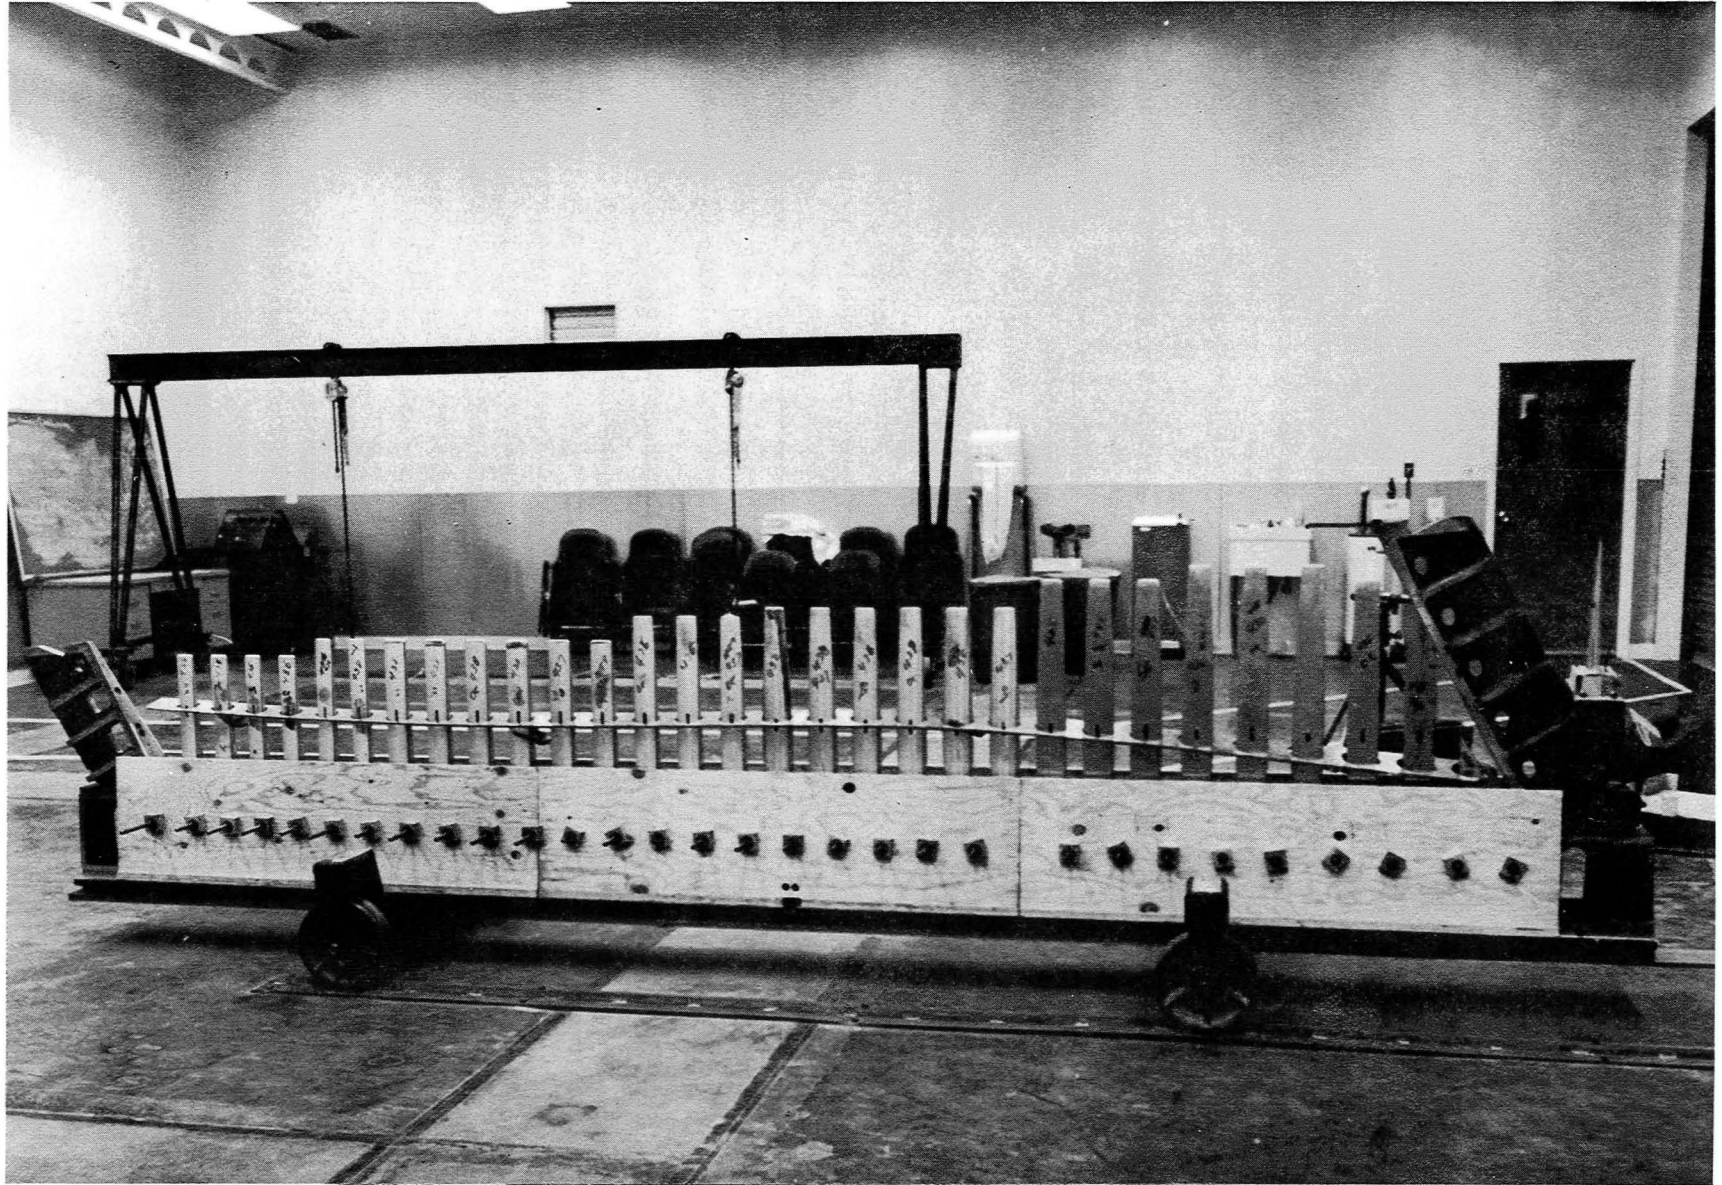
FRONT SPAR FORWARD FLANGE DUMMY PART ASSEMBLED ON PLM
